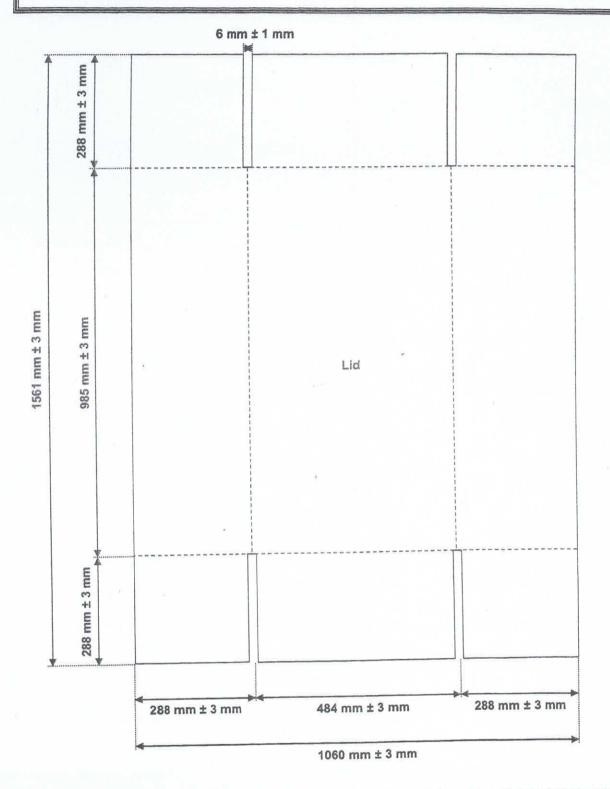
Dimensions of the lid component of the telescopic board box (flat measurements)
